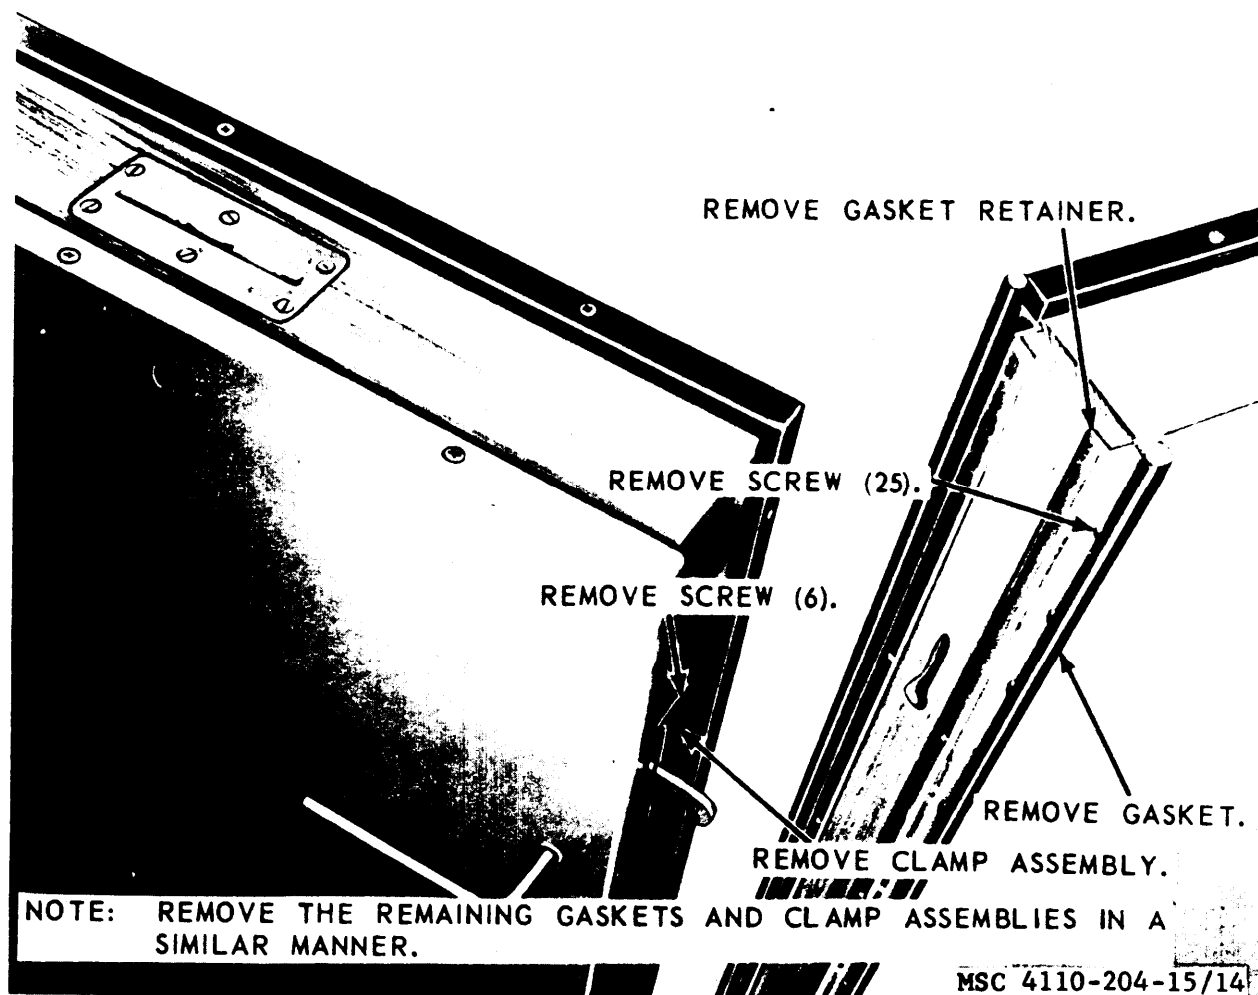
, Refrigerator panel and door seals, and clamp assemblies, removal and installation
